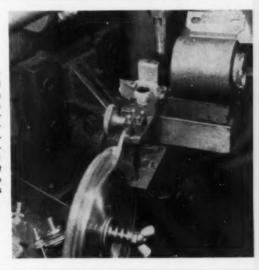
A two series electrode, the one on the left is a dummy and the other is molybdenum-tipped. A copper ground wire from the coil is welded to the zincplated steel spool flange in this setup.
